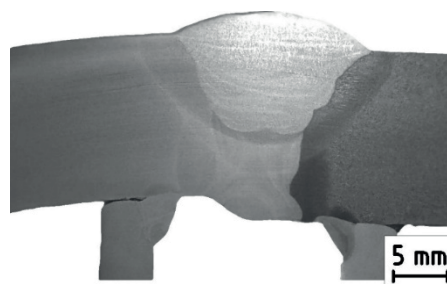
Macrograph of butt weld joint between cylindrical (left) and sphere-like (right) part of the sleeve
